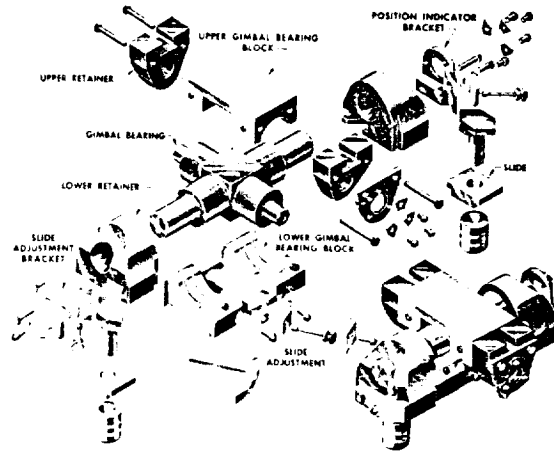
Typical cross-type gimbal mount designed for medium-thrust engine applications.
